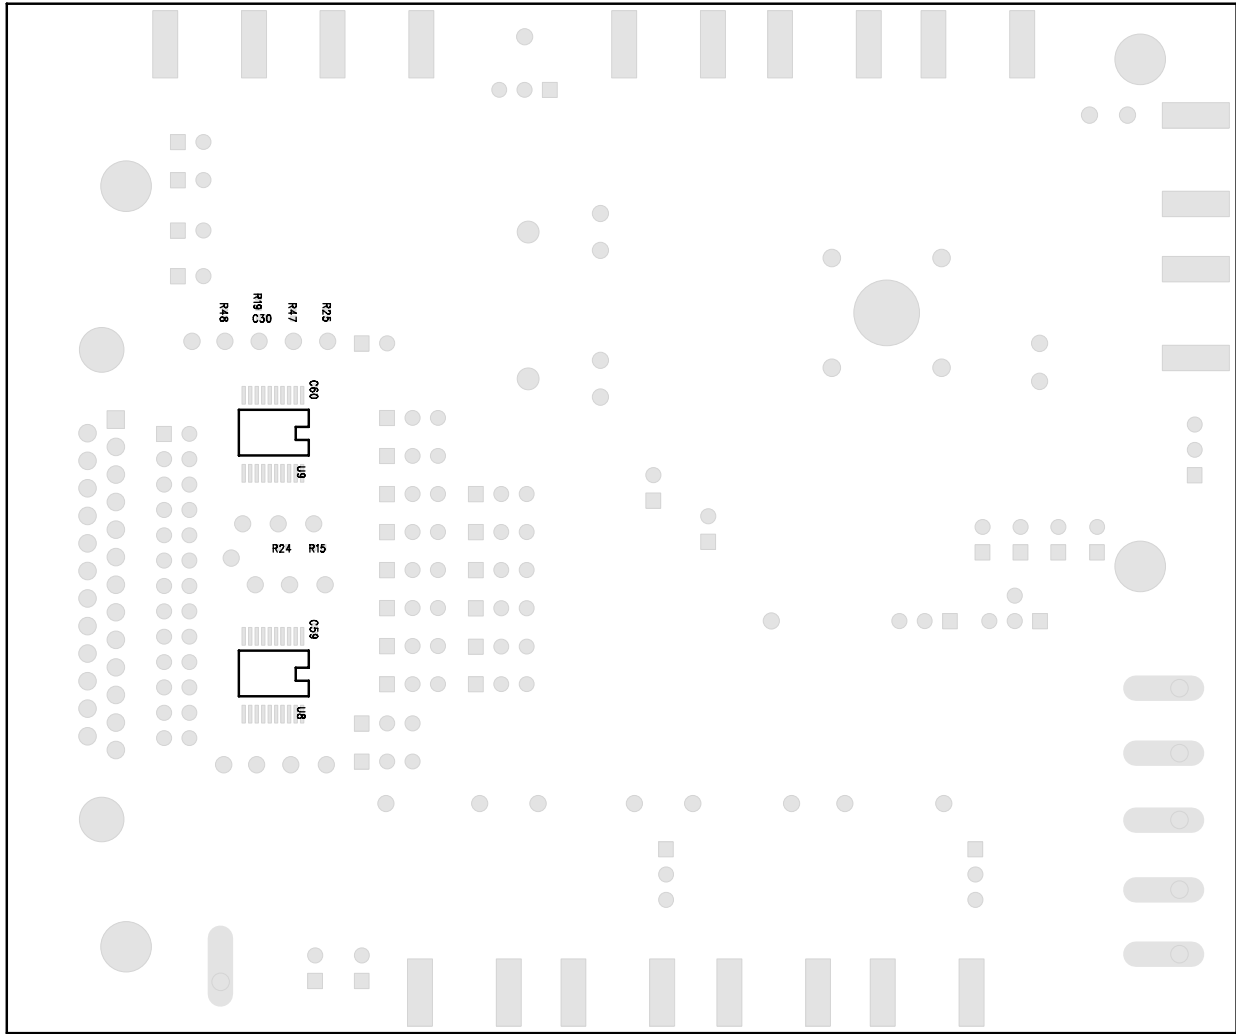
MAX2839AS EV Kit PCB Layout—Bottom Silkscreen
